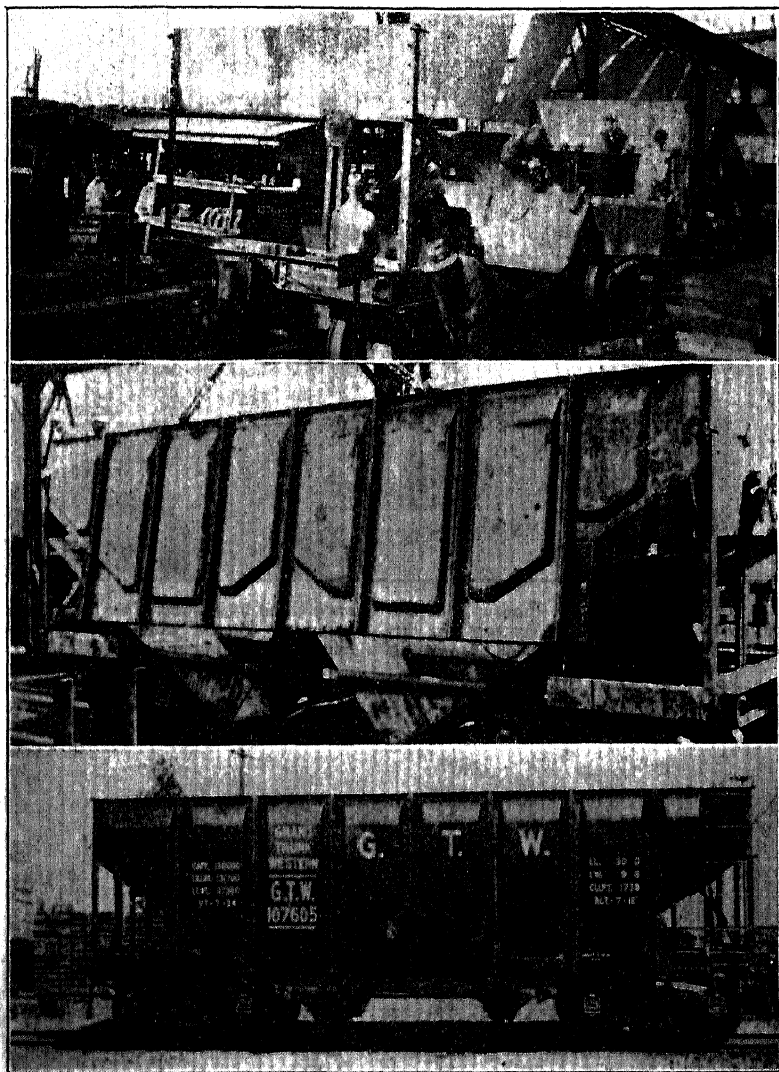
Rebuilding 50-ton hopper cars by arc welding. Top view shows assembly operations preparatory to applying side units. Center view shows an all arc welded steel panel section being raised into position. The bottom view shows the completely rebuilt car.
